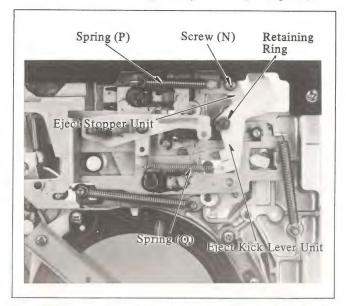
Assembly and Adjustment of Gears and Rods-(10)
